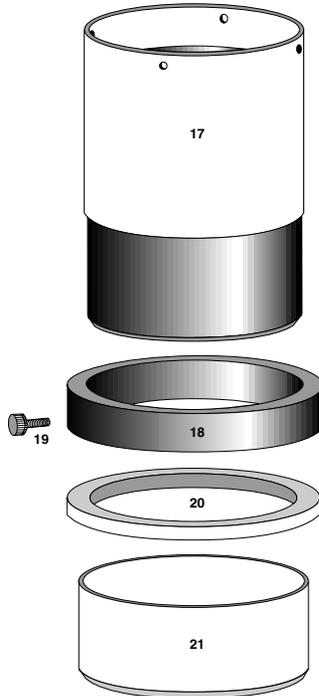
Exploded view of soil CO₂ flux chamber.
